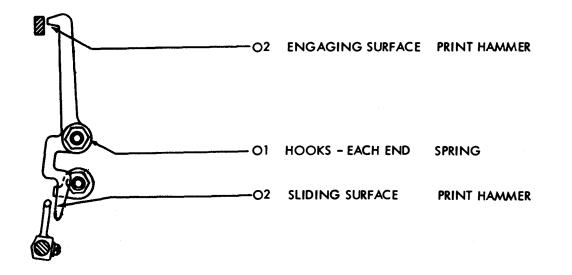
Blank Delete Mechanism (Sheet 2 of 2)
